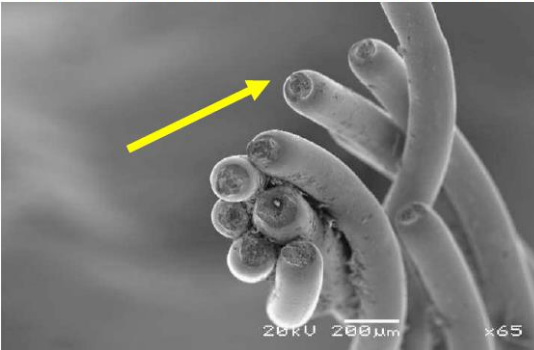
Fractograph showing core wire fractures (x65, SEM)
